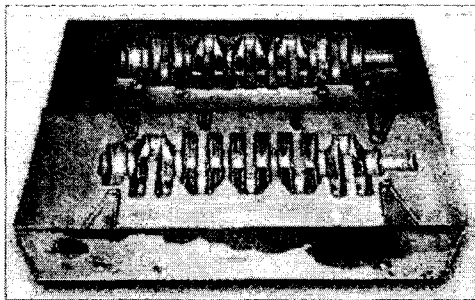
Shape of hot working dies (Rear Axle Shaft) applied development steels.
